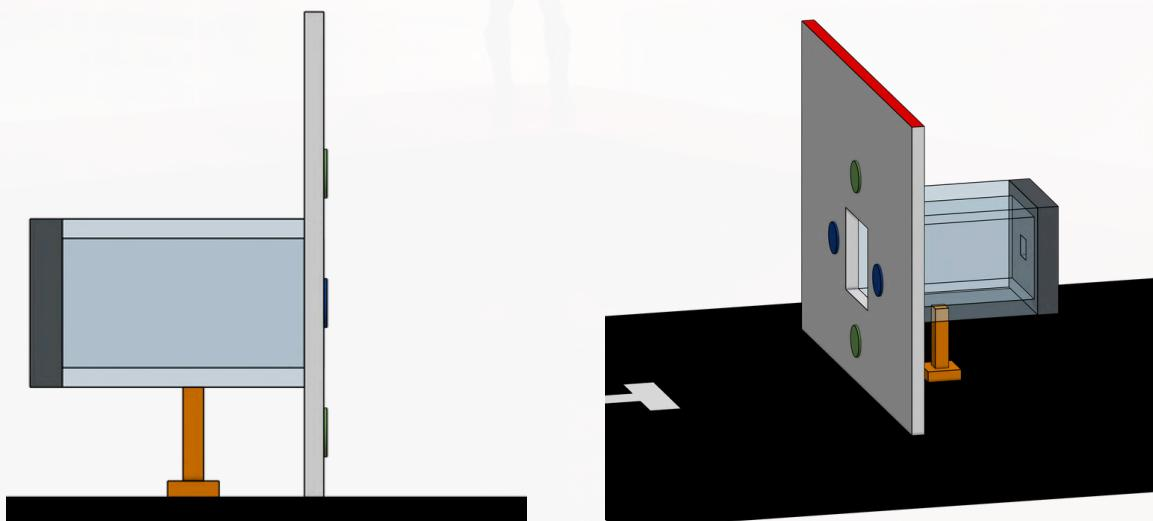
Particle Laser Particle Laser Side view (left), Isometric View (right). (For dimensions, refer to the provided Onshape assembly)
